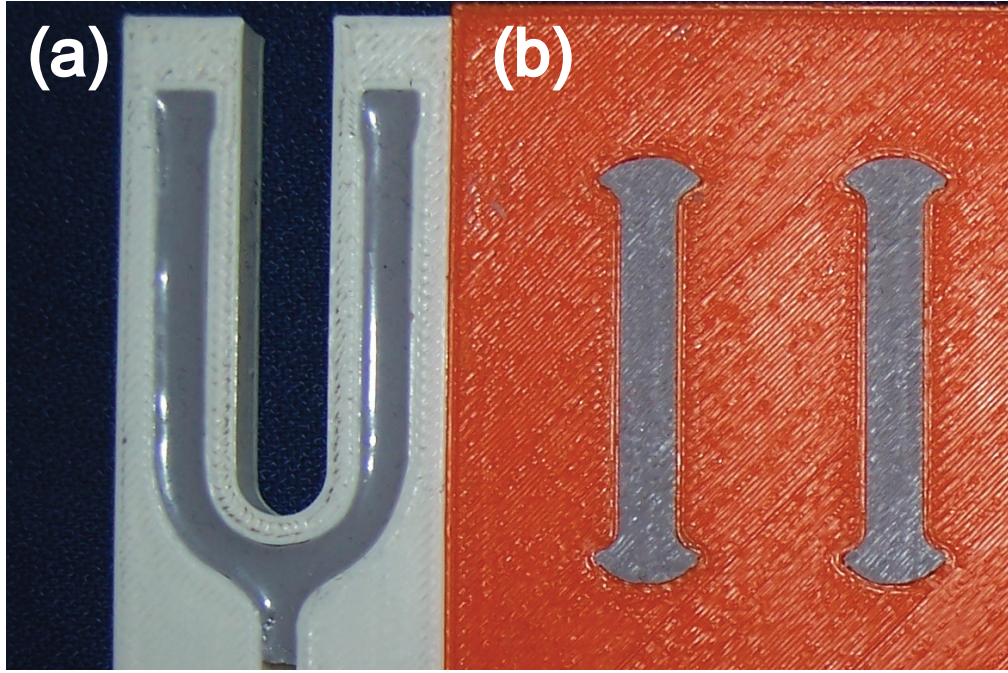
(a) shows the mold and shape deposition for the pre-tension mechanism, and (b) shows the compliant materials for testing the design of variable pulley configurations.
